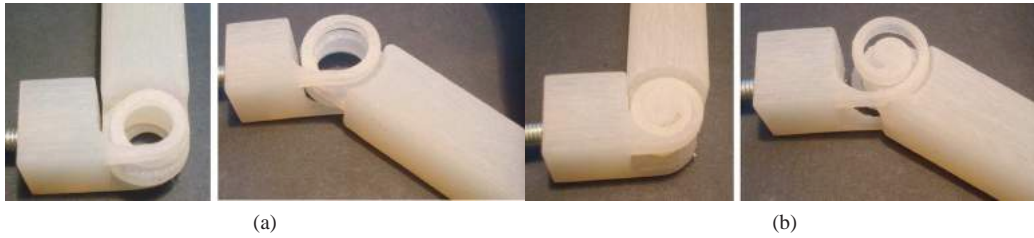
Deformed compliant joints: (a) SPIR, (b) HEL
